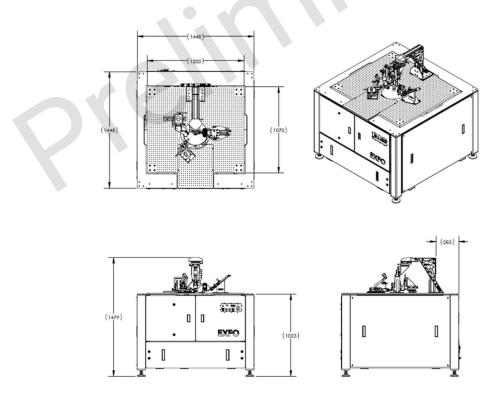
Technical drawing of the OPAL-EC-300 main system with dimensions in millimeters. Shown here with one (1x) PRO-P60 optical head and one (1x) PRE-00 manual electrical head. Not shown are the included the industrial rackmount PC, and the IT Kit (monitors, keyboard, mouse). Not shown are the chiller and the thermal chuck controller included with the (-TCH option). Non-final.
